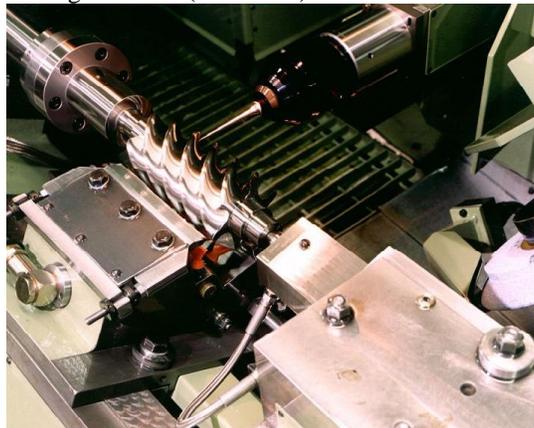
Renishaw scanning probe on a Holroyd rotor grinding machine
